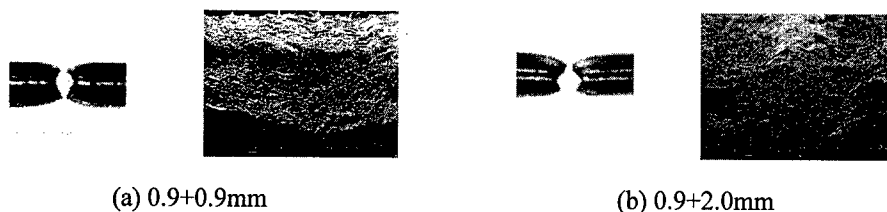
Fracture surfaces (S.E.M 500x)
